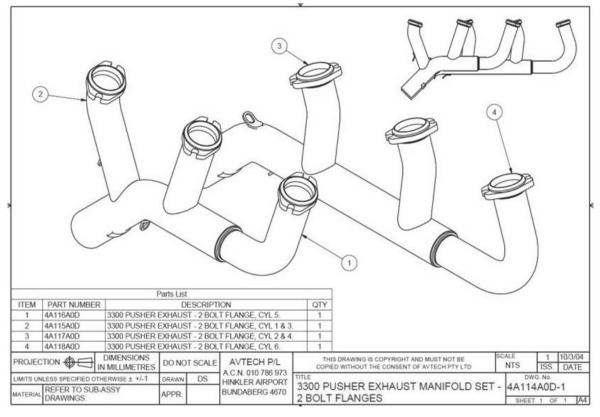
3300 Exhaust System Type 1 (J200/J400, J230/J430, J250/J450)
